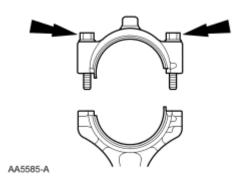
Positioning Bearing, Rod Cap & Bolts Courtesy of FORD MOTOR CO.
